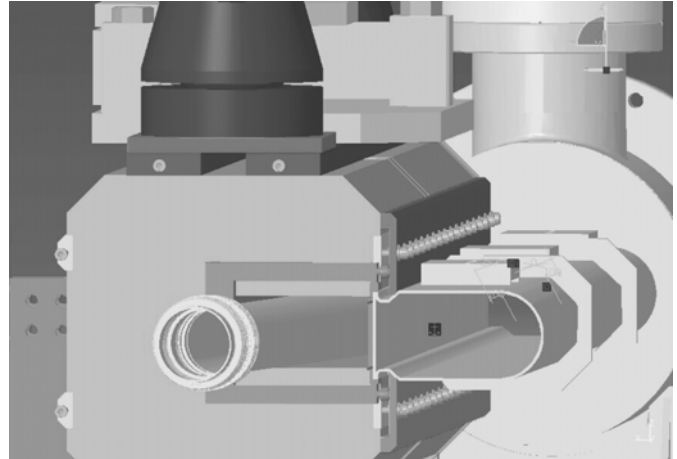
Magnet and ejection vacuum chamber with exit flanges removed.
